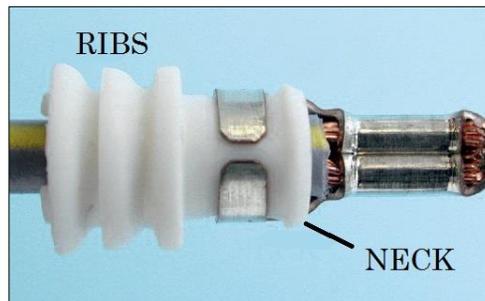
H - INDIVIDUAL CABLE SEAL DETAIL
